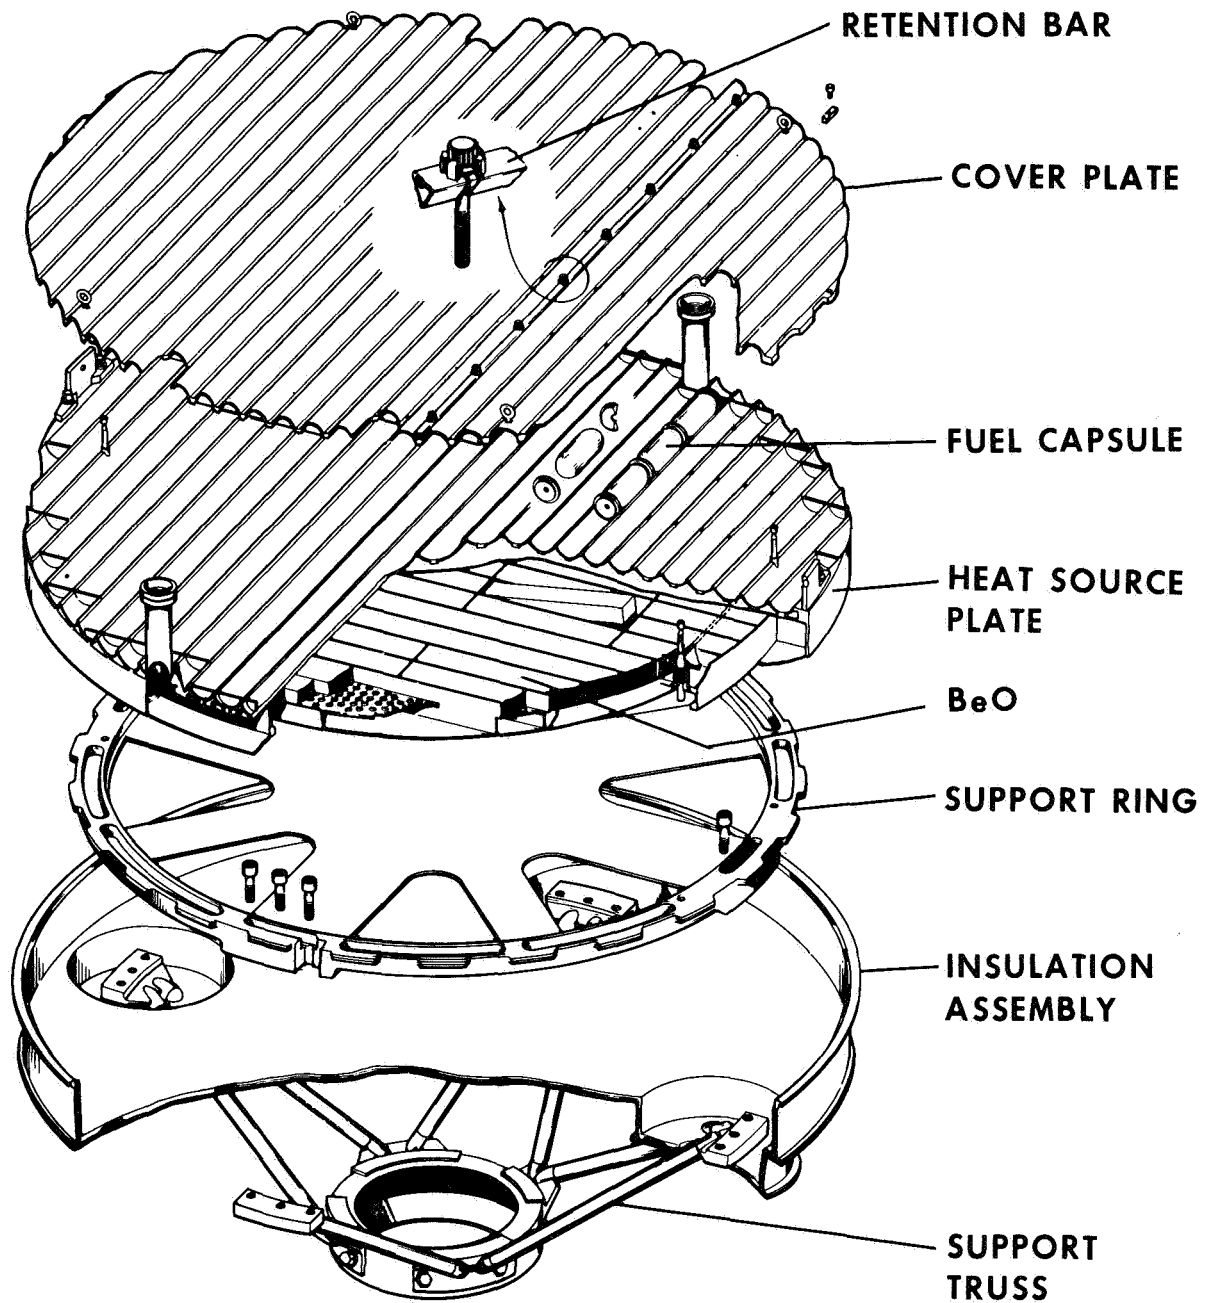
EXPLODED VIEW OF THE HEAT SOURCE PLATE
